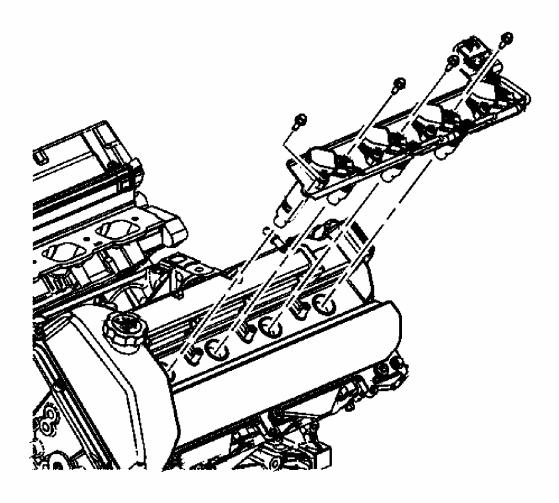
Identifying Ignition Coil Assembly Courtesy of GENERAL MOTORS CORP.
